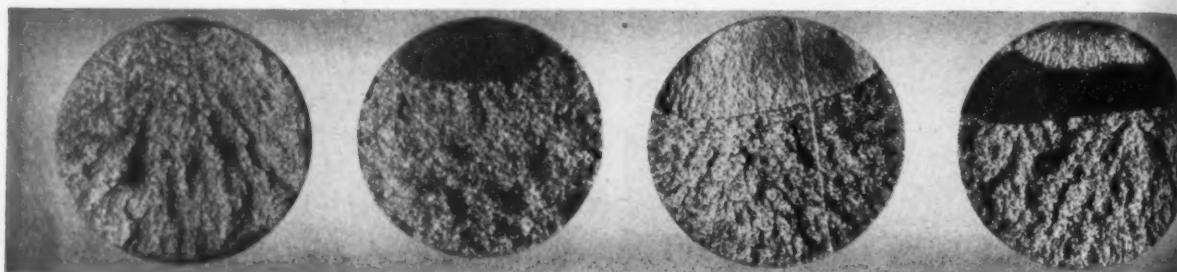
Above—This series by Bacon illustrates progress of fracture through a medium carbon steel specimen
